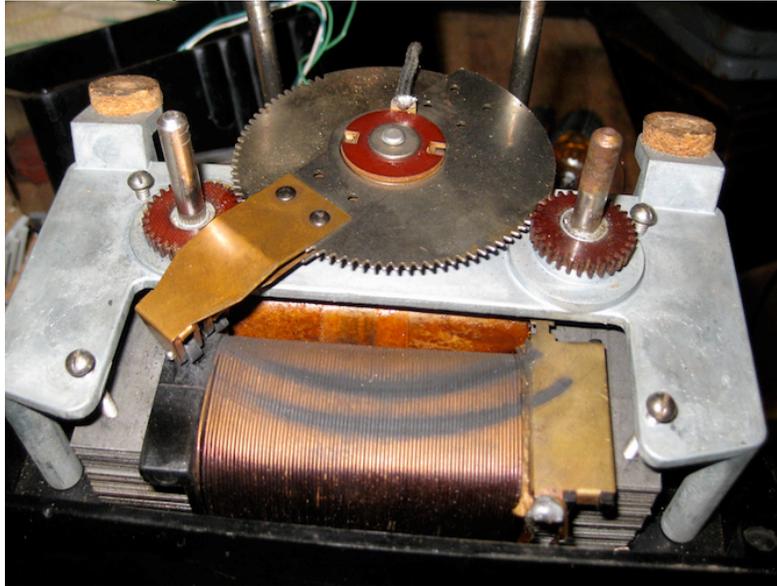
Bearing Plate Assembly and Transformer Secondary Windings (from Top)
